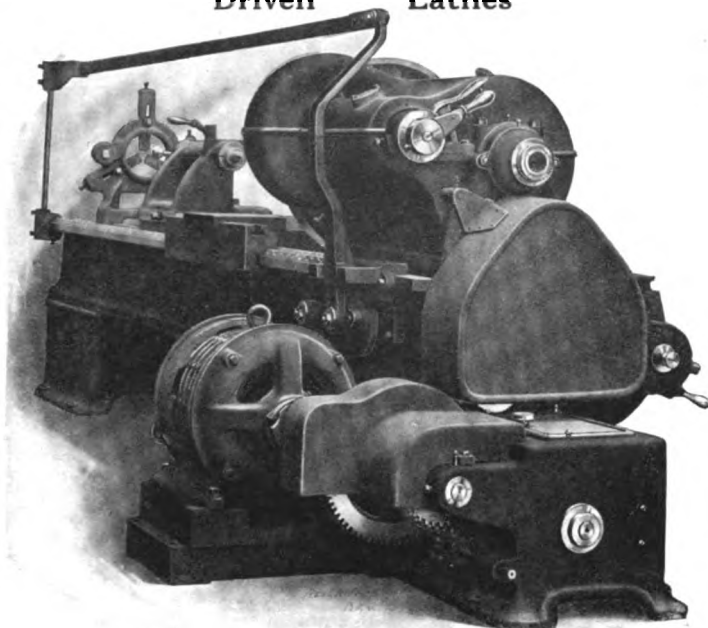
Bradford Single Pulley Motor Drive and Silent Chain Transmission
